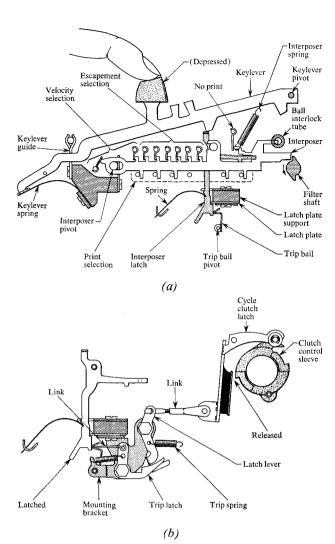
Section view of (a) Composer keyboard and (b) interposer latch assembly,
